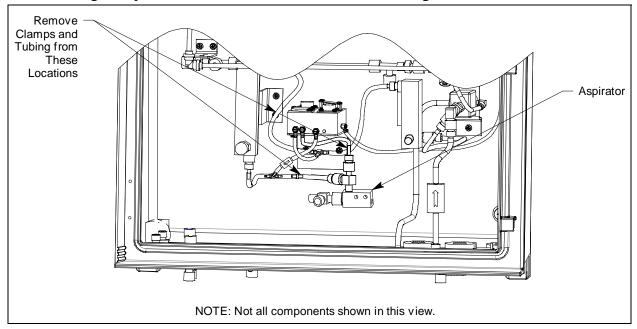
Clamp and Tubing Removal for Aspirator Replacement
